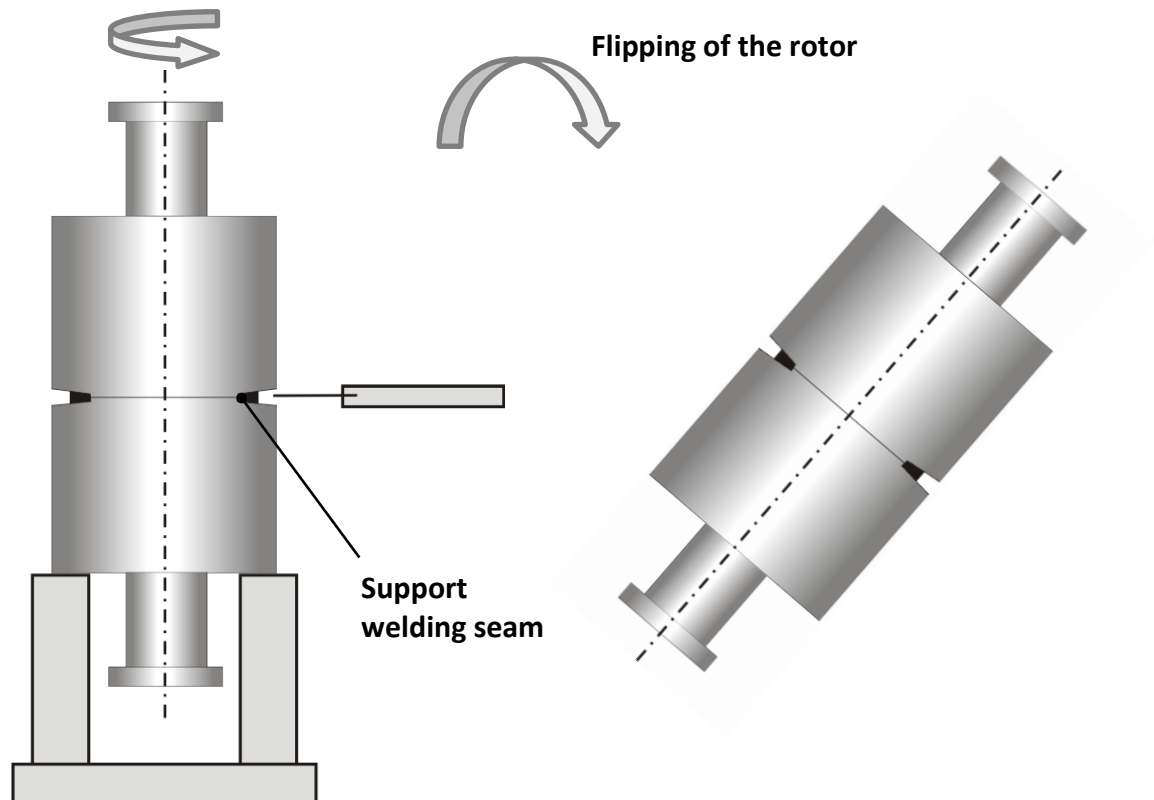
Support welding and flipping scheme – V-H/TIG-SAW
